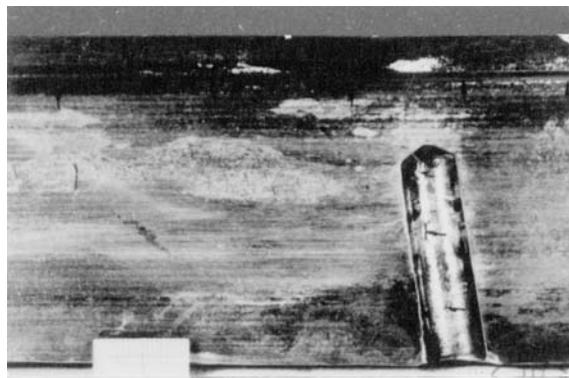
Shrink fit surface with groove, both with areas of fretting corrosion [5].
